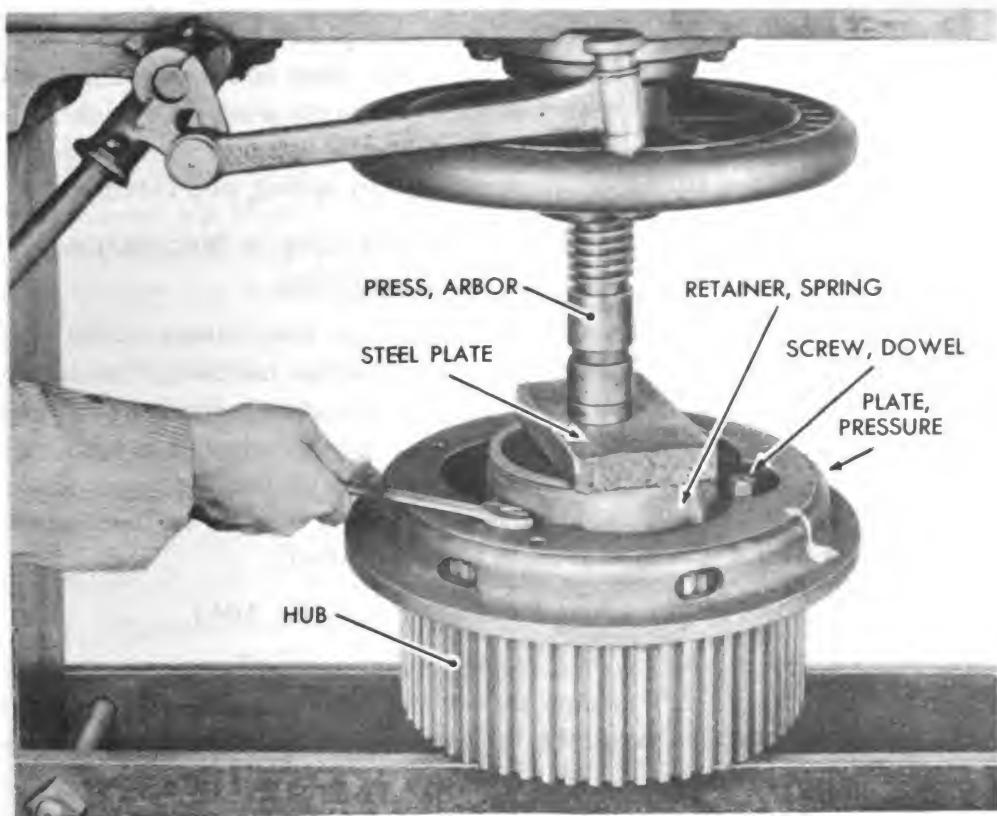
Compressing Steering Clutch Spring and Removal of Retainer
